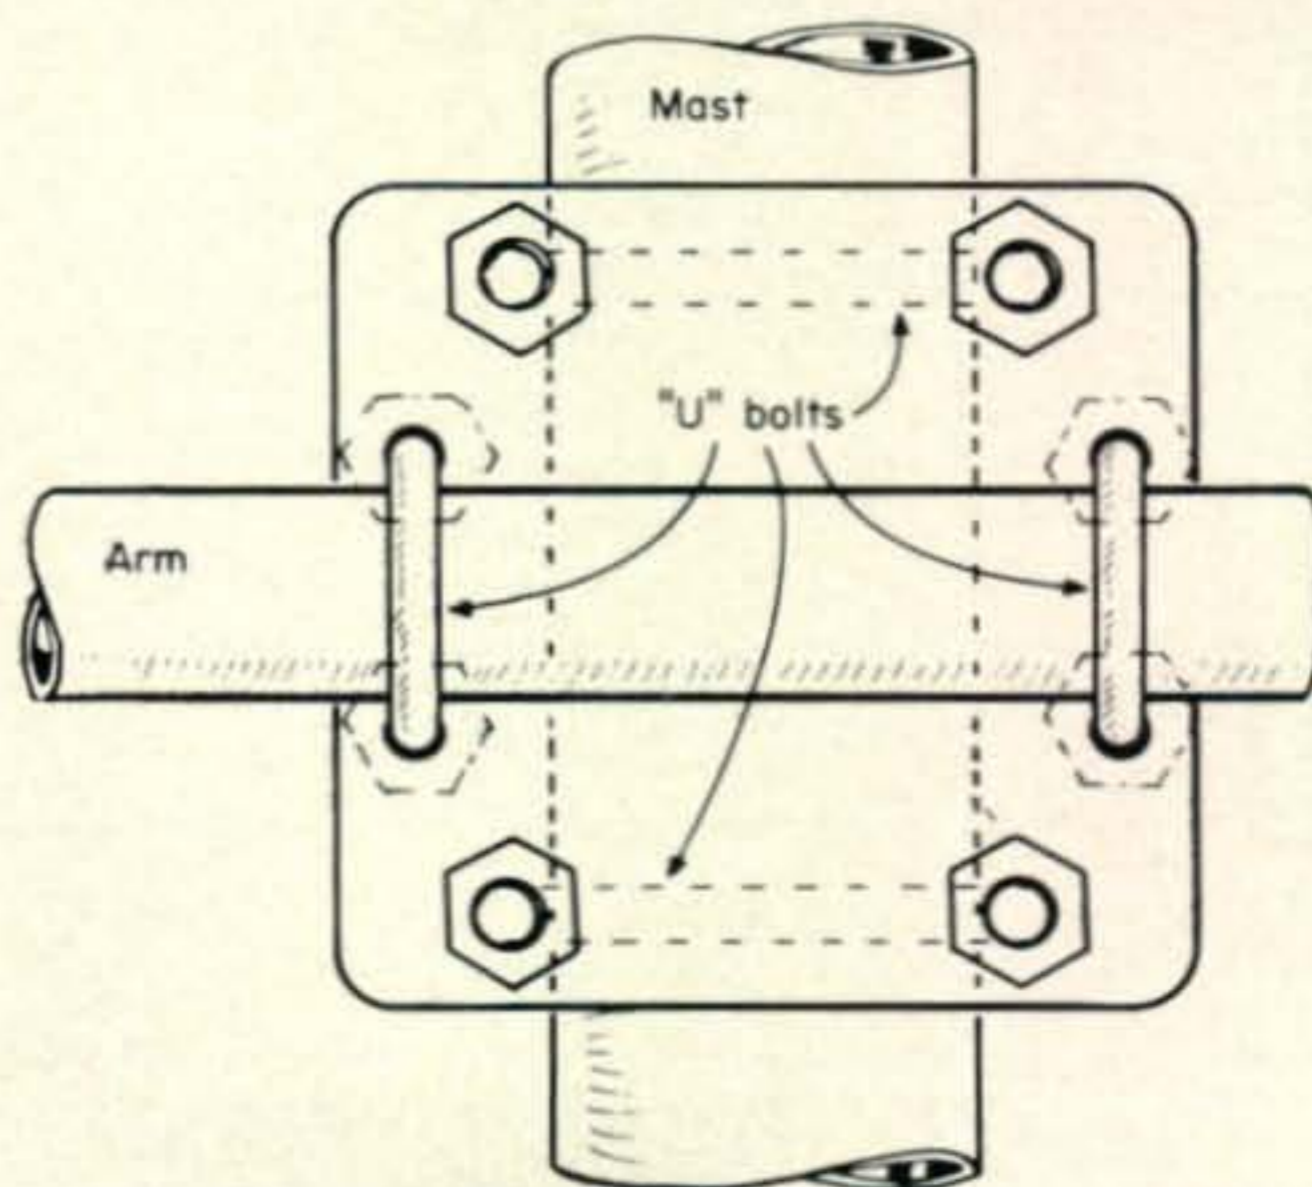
Dipole mounting plate detail. The plate is constructed of 1/4" aluminum plate. U-bolts should be chosen to fit tubing sizes used.
